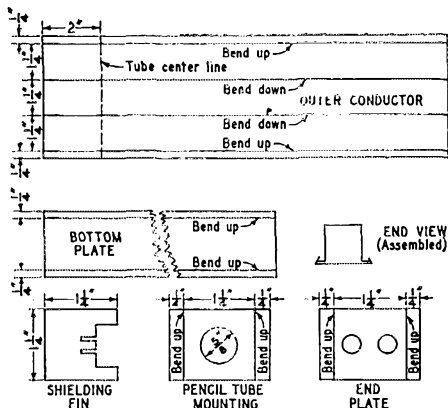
Flashing copper parts of the 420-Mc. tank circuits. The outer conductor (top sketch) is 10 inches long for the line using miniature tubes, or 12 inches for the pencil tube model. The middle drawing shows the bottom plate (left) and an end view of the assembled line. At the bottom left is the shielding fin used with the miniature tubes, and at the middle is one of the two plates needed for mounting the pencil tube. These plates should be tailored to fit the line assembly after it is bent up. They are soldered in place, two inches from the end of the trough. The right-hand plate is fastened in the end of the trough, the two holes being for the heater by-passes,  $C_2$  and  $C_3$ .
